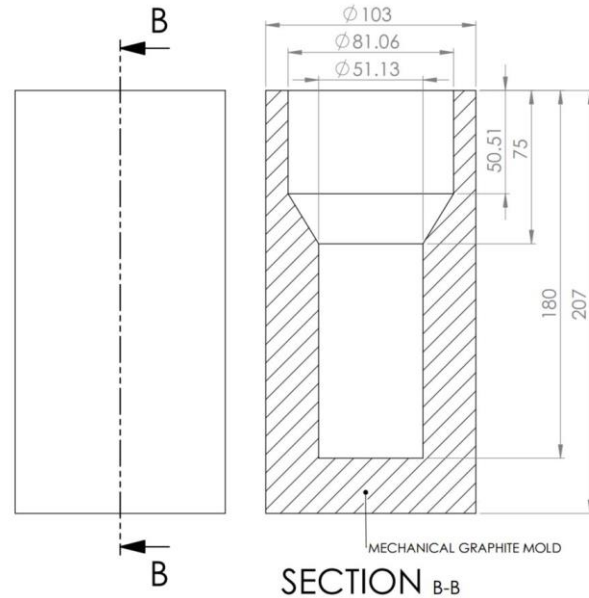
Mechanical mold drawing (dimensions in mm)
